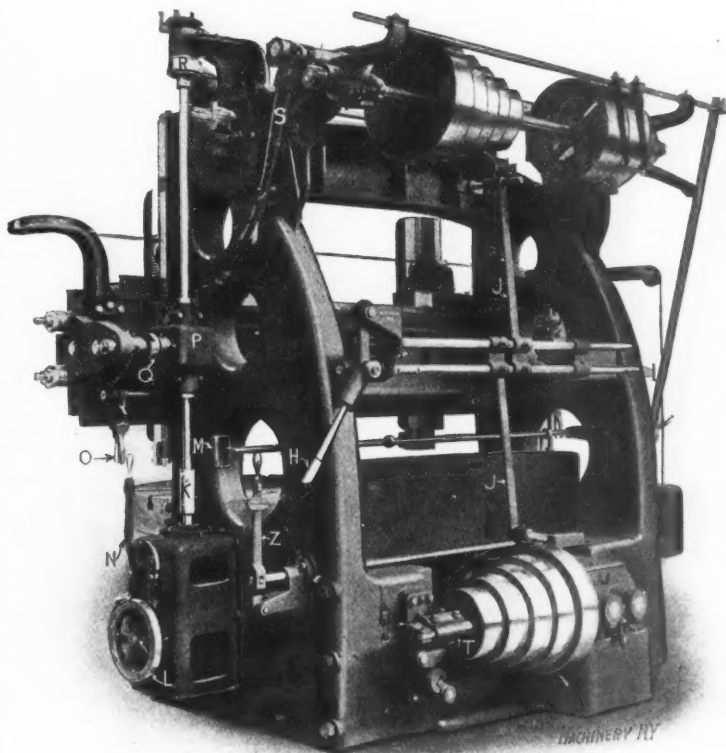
Rear View of "New Model" Boring Mill, showing Main Drive, Controlling Handles, Levers, etc.
